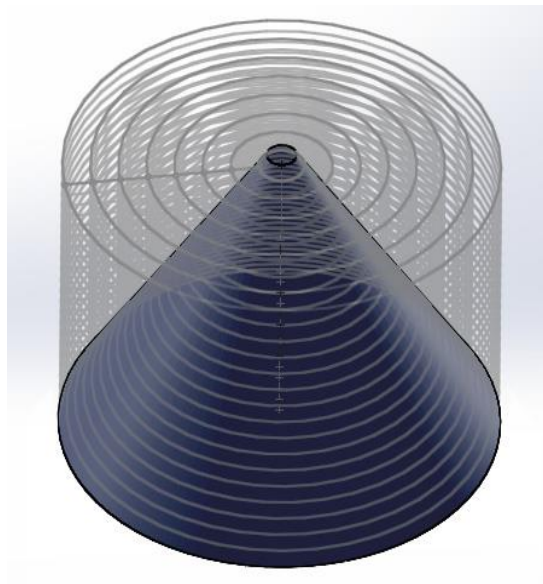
The tool path for a 100  $\mu\text{m}$  tool cutting the layered cake pattern consisted of concentric radiating circles.
